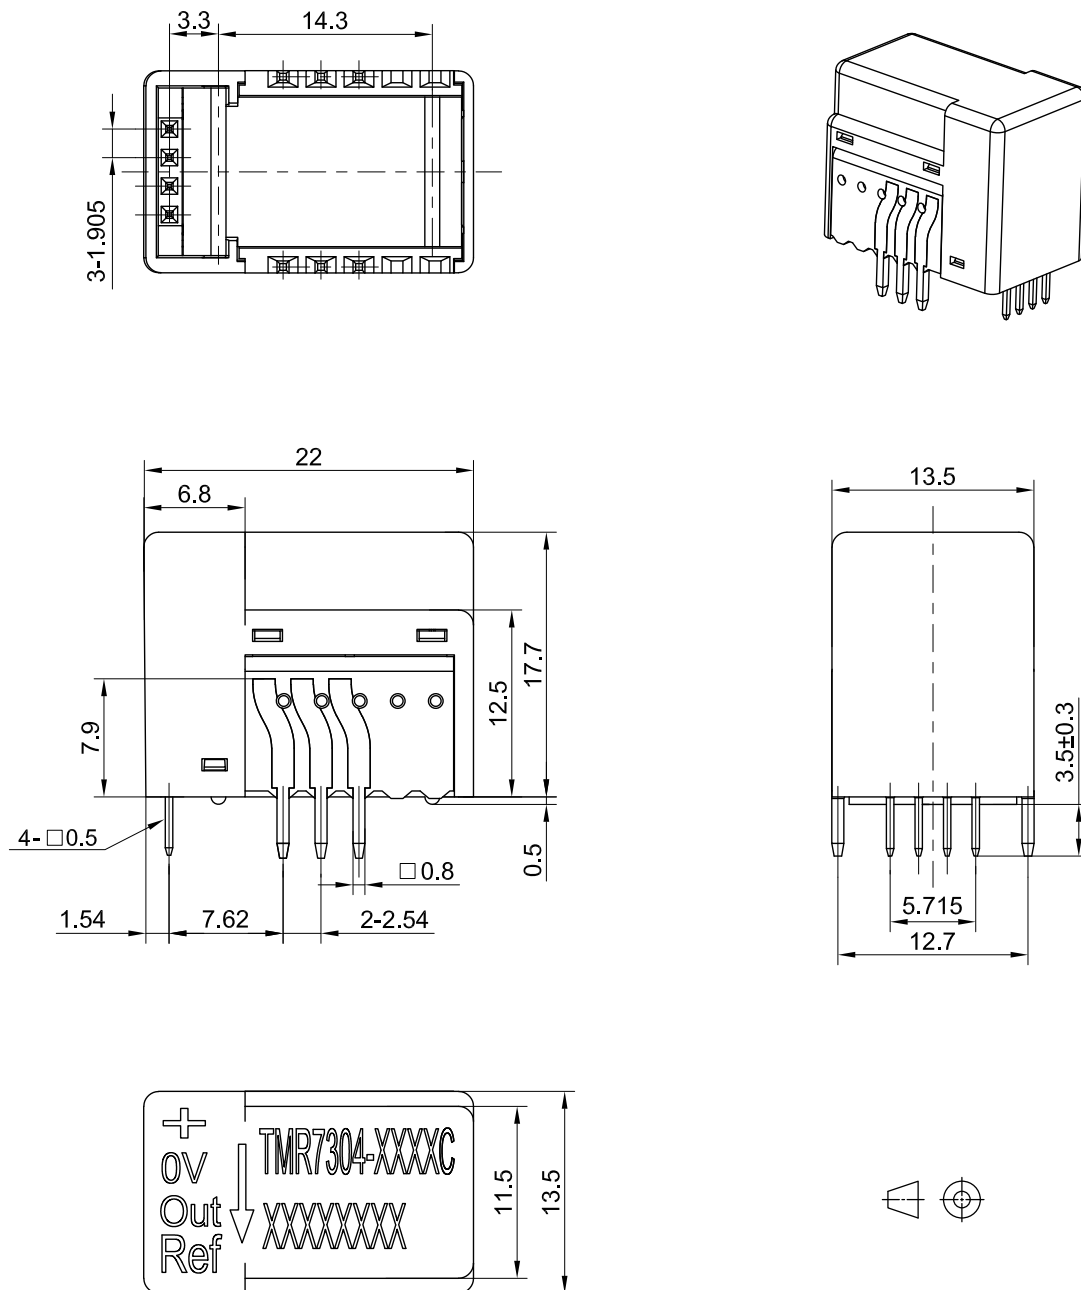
Dimension for TMR7304-C (unit: mm, tolerances for unmarked scales ±1 mm)
